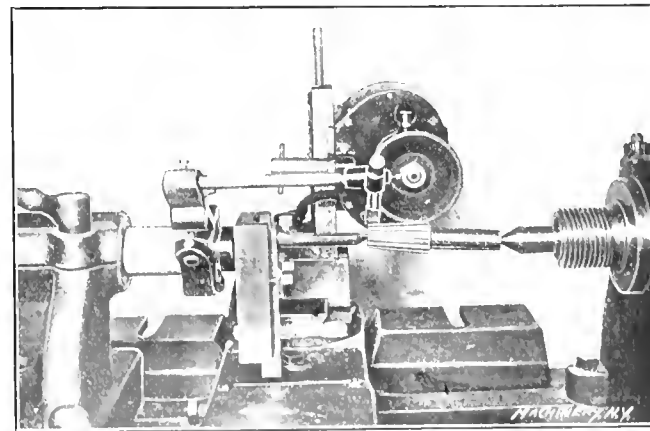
Sharpening a Taper Reamer in the Lathe using Adjustable Tail Center
